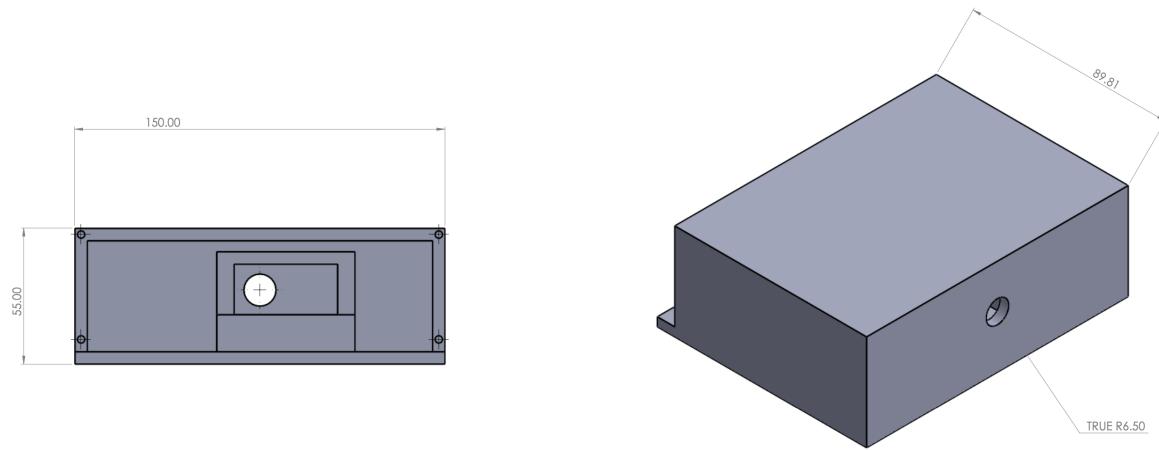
CAD Drawing of the house of the servomotor.
